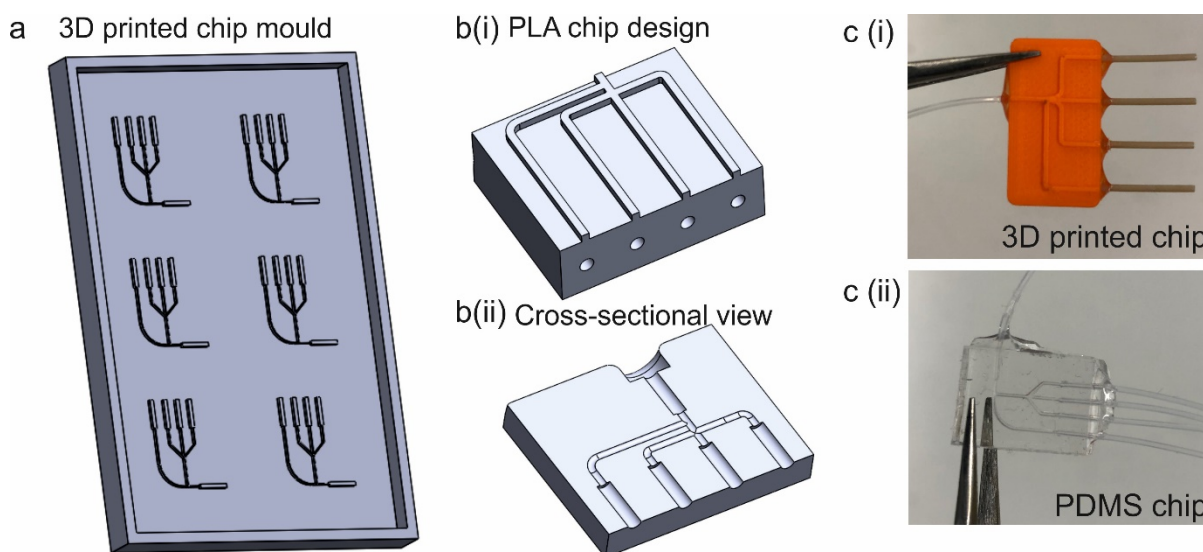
Microfluidic chips used for experiments presented in this chapter. (a) Solidworks CAD file of mould (to be printed using VeroClear material) for fabricating the PDMS chip in (c. ii). (b. i,ii) Solidworks CAD file of microfluidic chip to be printed using PLA material. (c. i) Photograph of 3D printed microfluidic chip (650 μm channels) with PEEK tubing inlets and a PTFE tubing outlet. (c. ii) Photograph of a PDMS microfluidic chip with PTFE tubing inlets and outlet.
